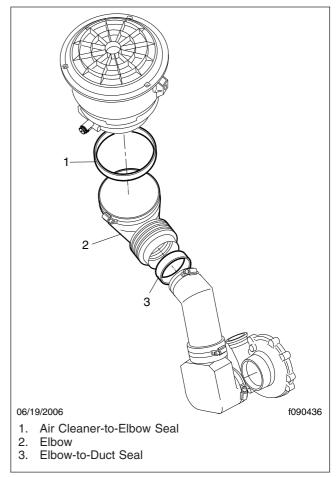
, Typical Elbow-to-Duct Configuration (MBE906 engine shown)
